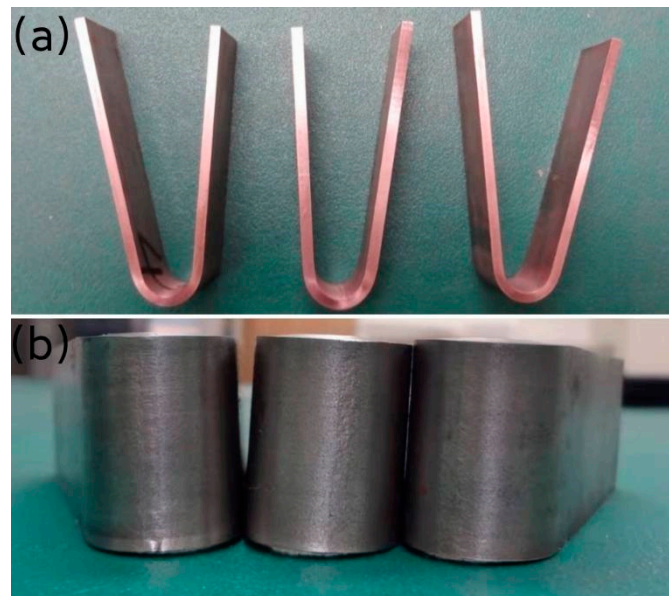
The effect of 180-degree bending of welding samples. (a) bending test samples of 304 stainless steel joints; (b) appearance of bending test samples.
